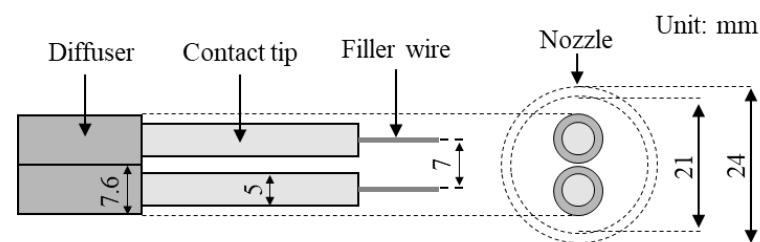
Schematic diagram of designed tandem welding torch.
